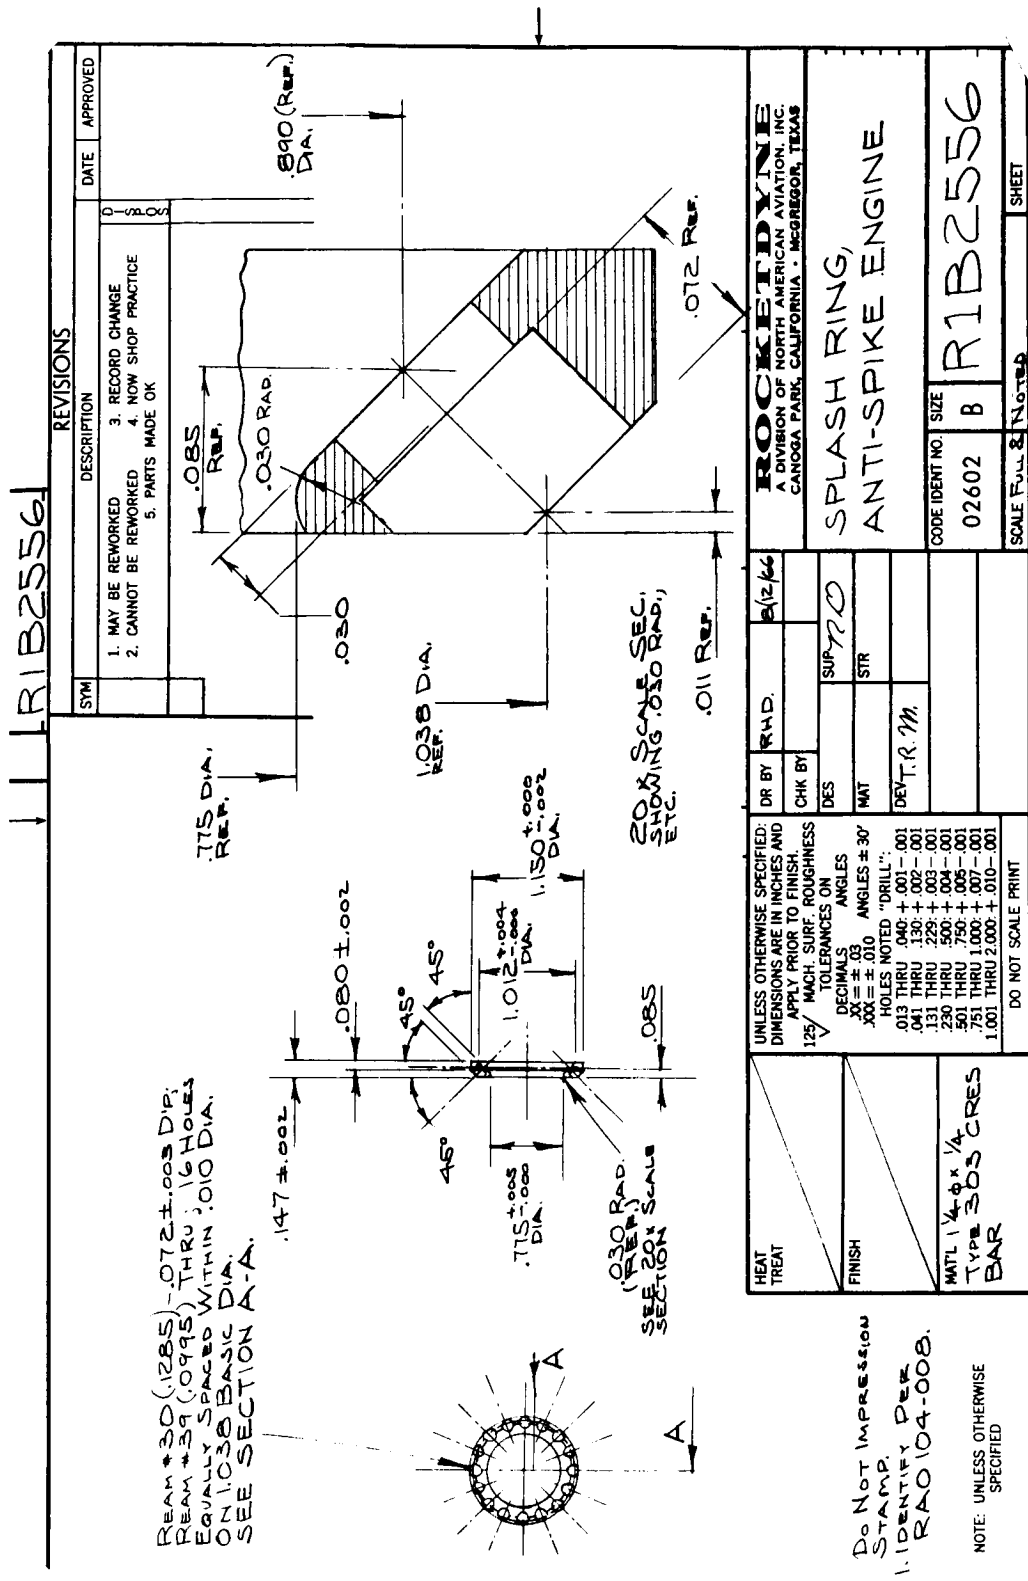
Splash Plate Used for Mechanically Bonded Pellets--Ring Insert
